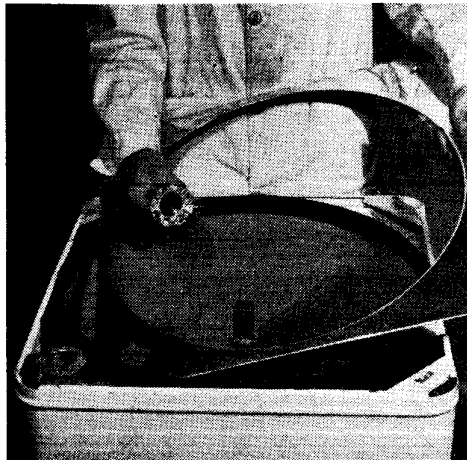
After removing wringer socket and three screws top of cabinet can be lifted off
